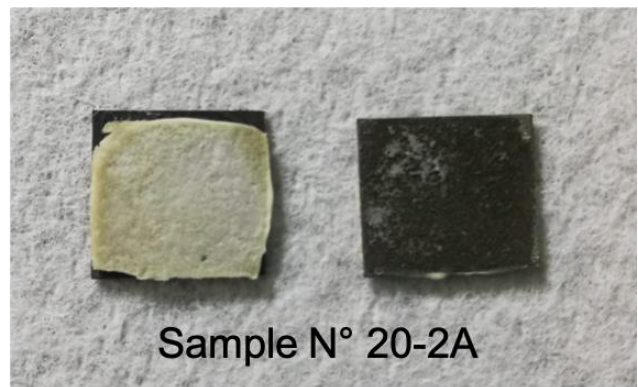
Fracture surfaces of post-aging type-20 joints.
